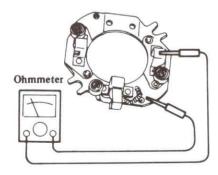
Testing starter brush holder insulation (Sec 10)
